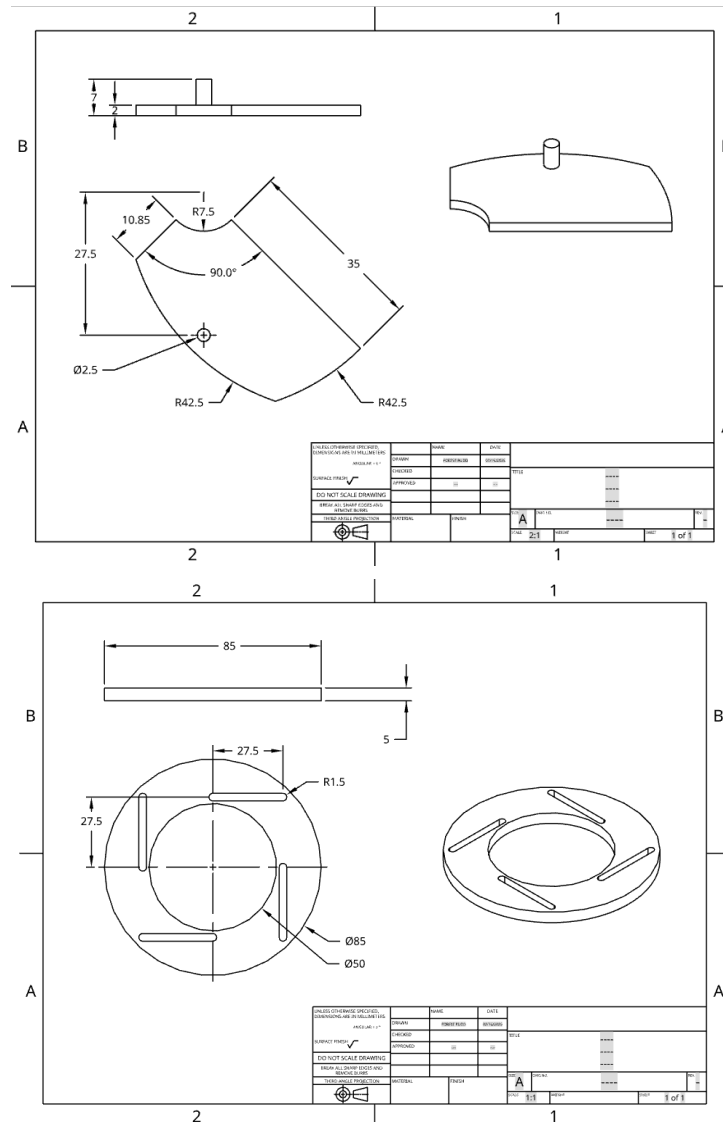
Mechanical Drawings of Mechanical Iris First Prototype
